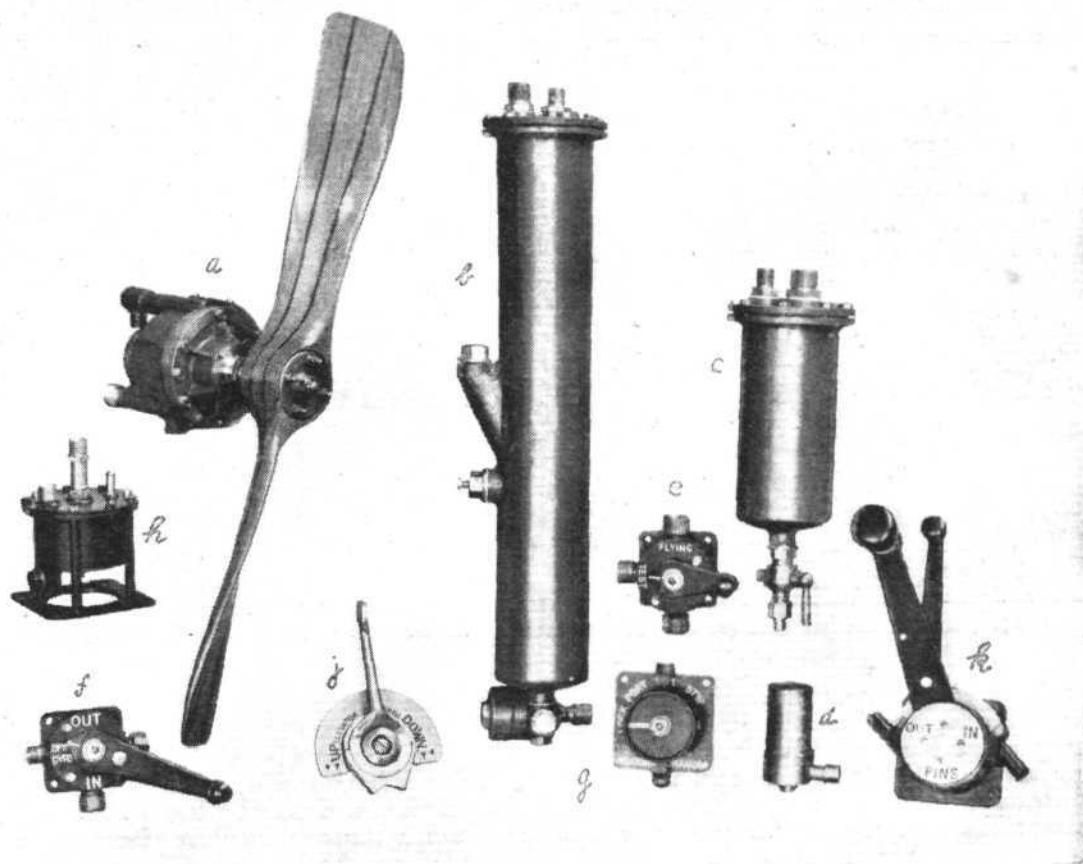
Component Parts of Compressor System, and Control Levers. a, Compressor and Windmill. b, Oil Reservoir. c, Oil Separator. d, Pressure Relief Valve. e, Test Cock. f, Main Control Cock. g, Course-change Cock. h, Air Expansion Chamber. j, Pitch Control Lever. k, "Pins" Lever.
